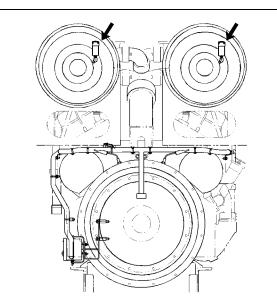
g01640335 A typical location for the air cleaner service indicators
